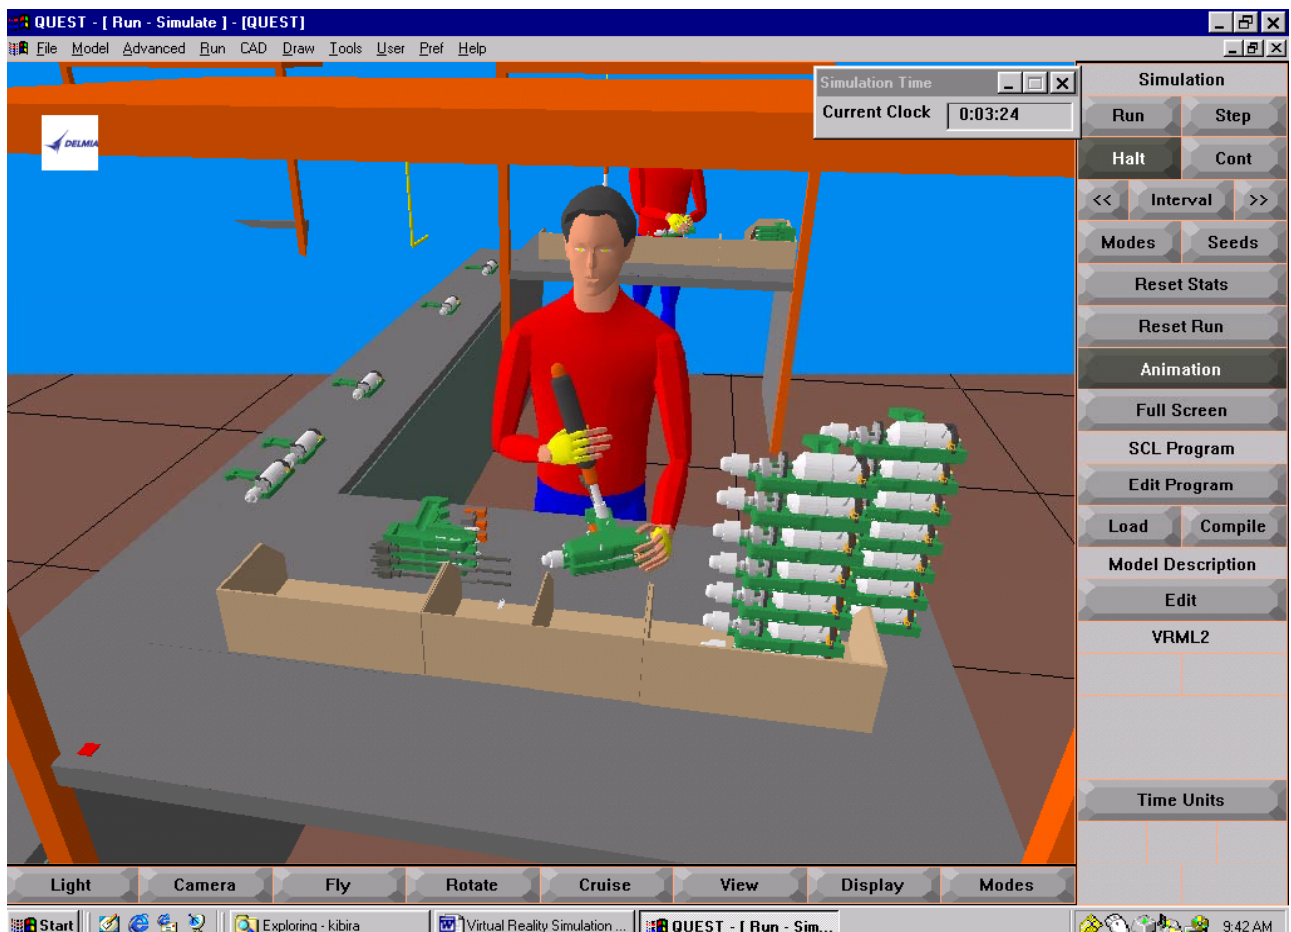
An Operator Finalizes the Assembly of a Hand-Held Power Drill
